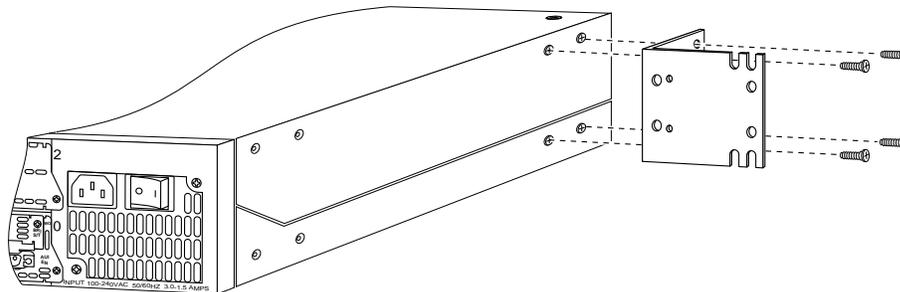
Bracket Installation for a 19-Inch Rack—Rear Panel Forward
